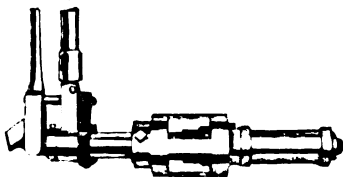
"IDEAL" SELF-FEED TUBE CUTTER
